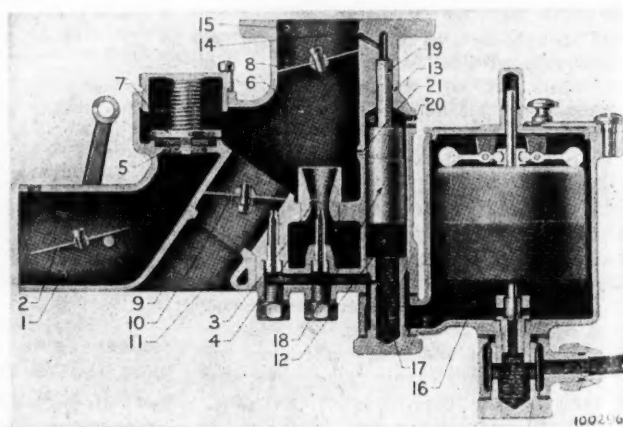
This cutaway section of the Ball and Ball carbureter used on the Oldsmobile, 1920 model, shows the air arrangement of the nozzles and the flow of the fuel
